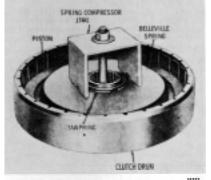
Compressing Fifth-and Sixth-Gear Clutch Spring
